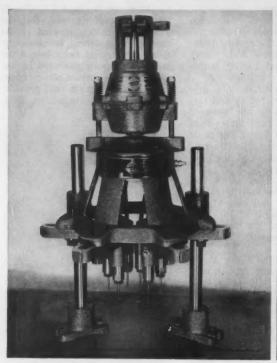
Circle type flex-shaft multiple-spindle drilling and tapping head
